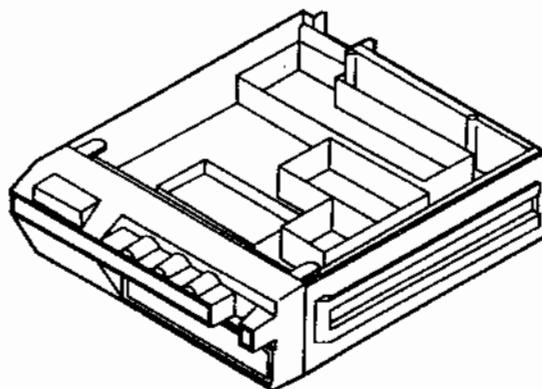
1a — SYN-TECH XTR Chassis and Control Head
